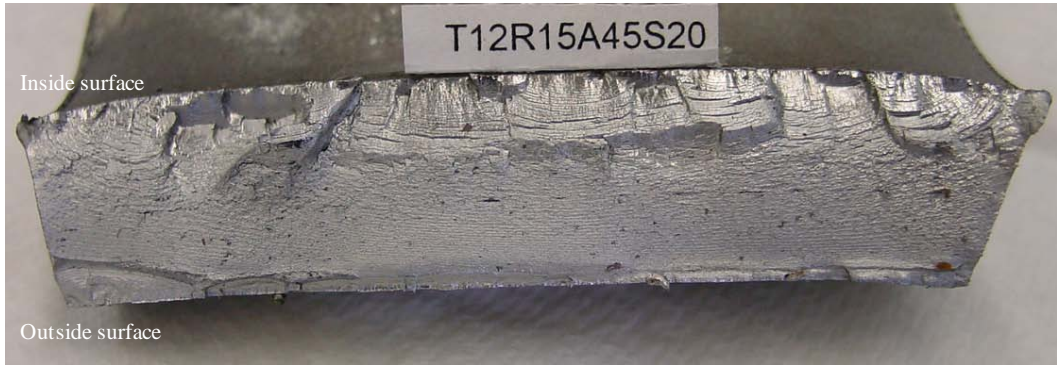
Pictures of fracture surface: strip specimen series of T12R15A45
